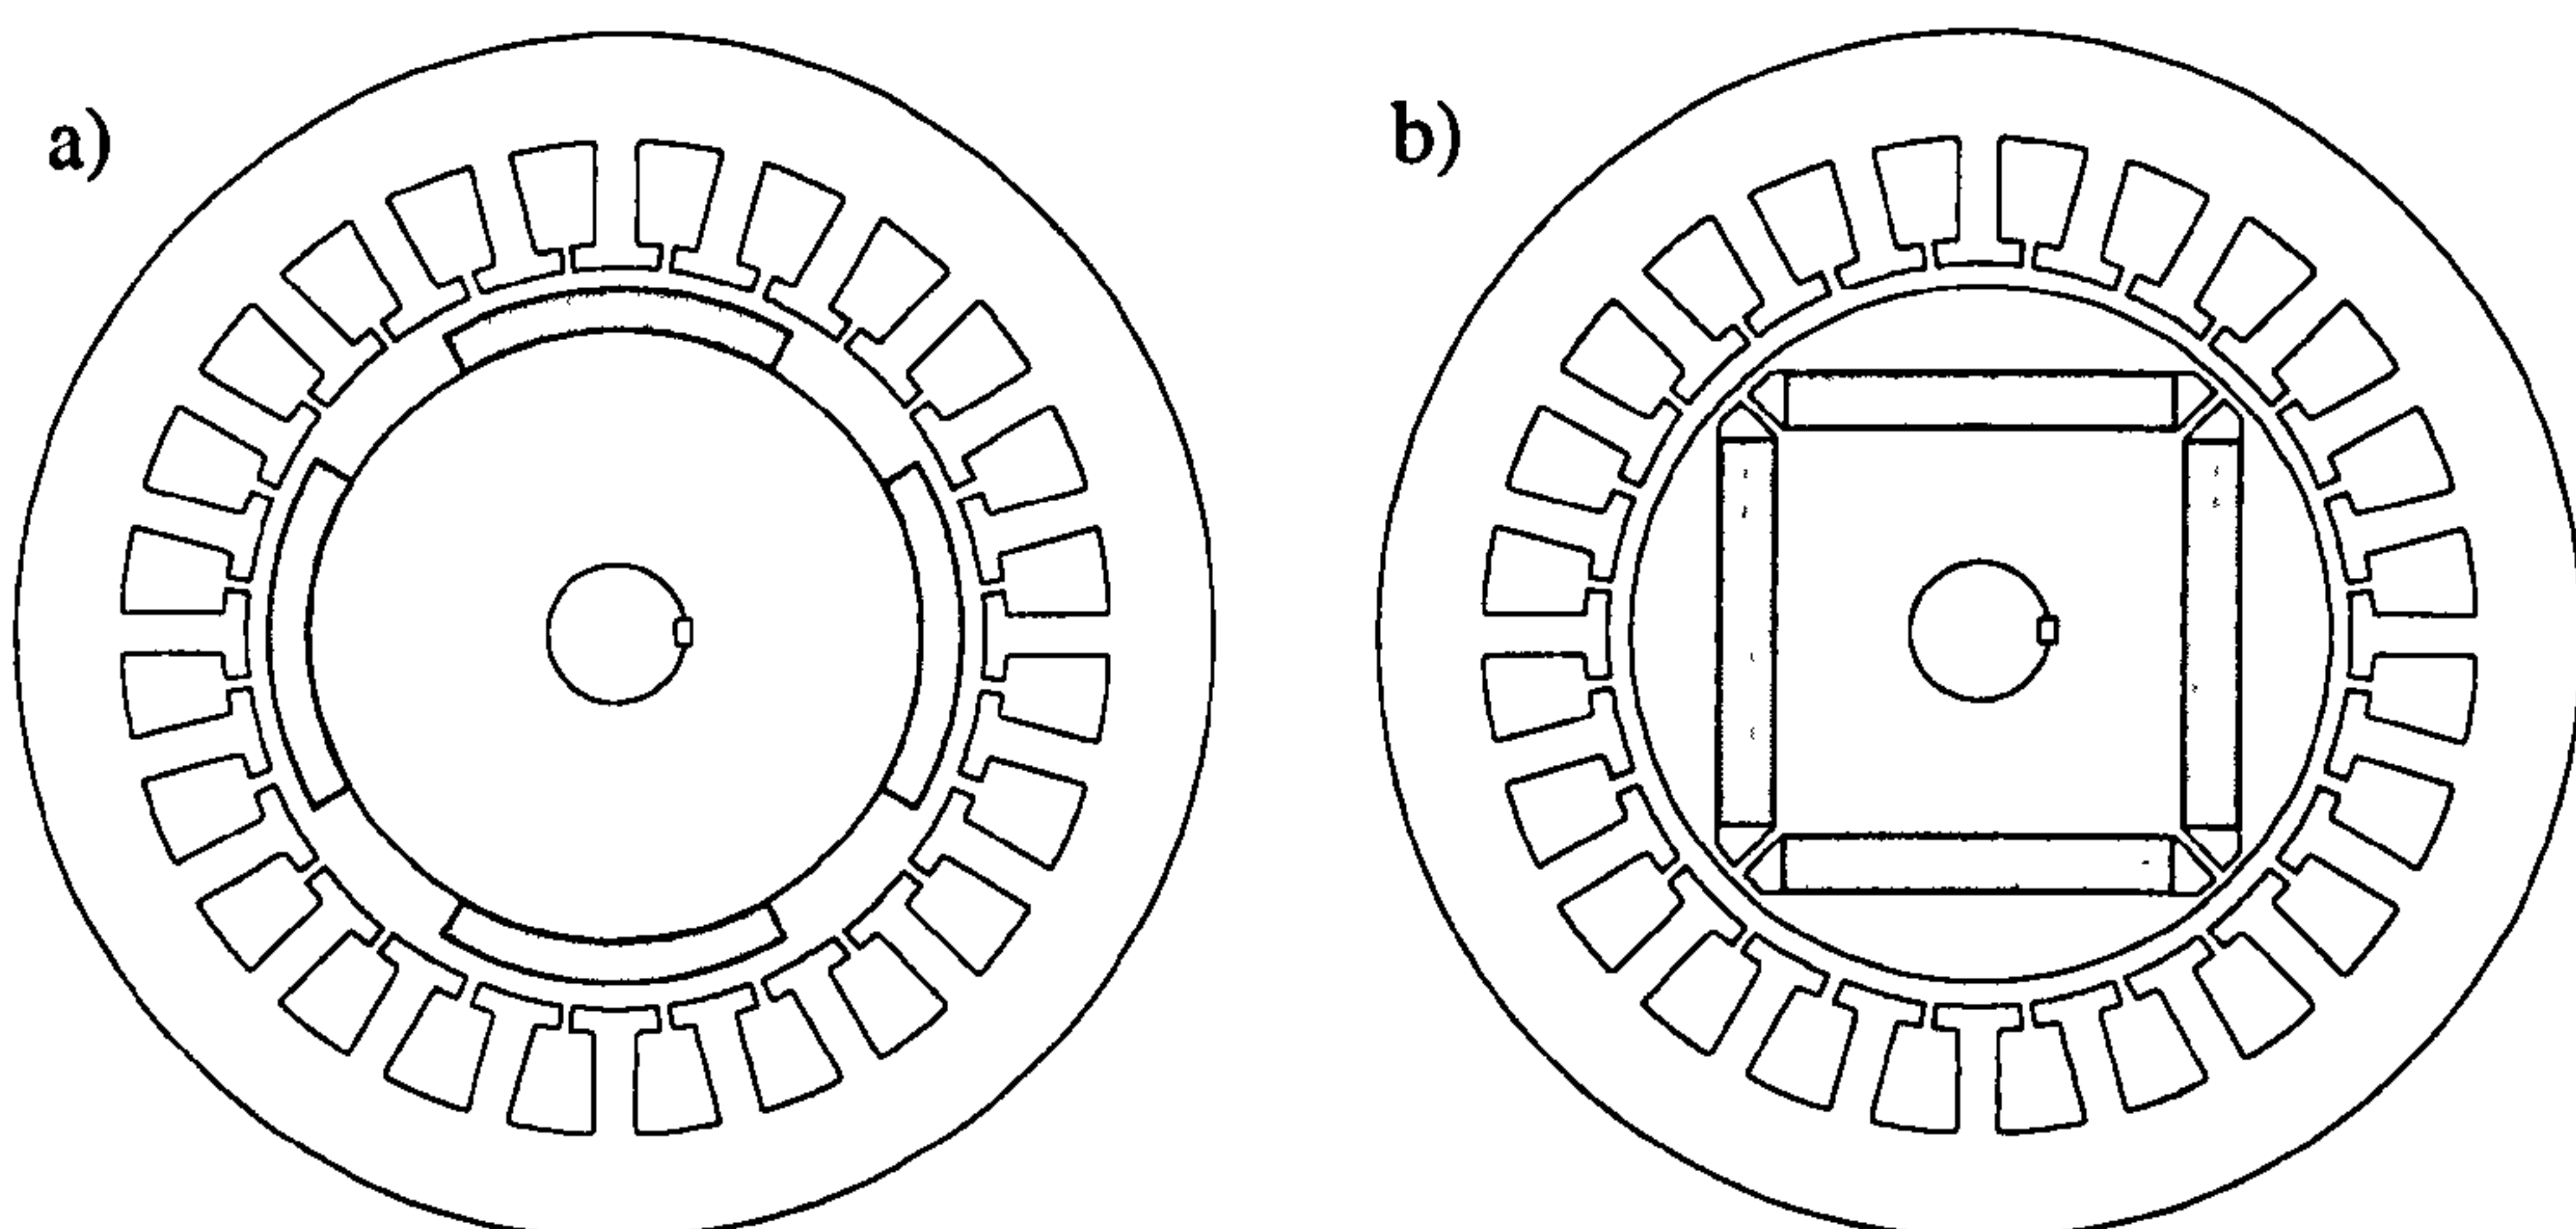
Different rotor designs. a) SMPM, b) IPM.
